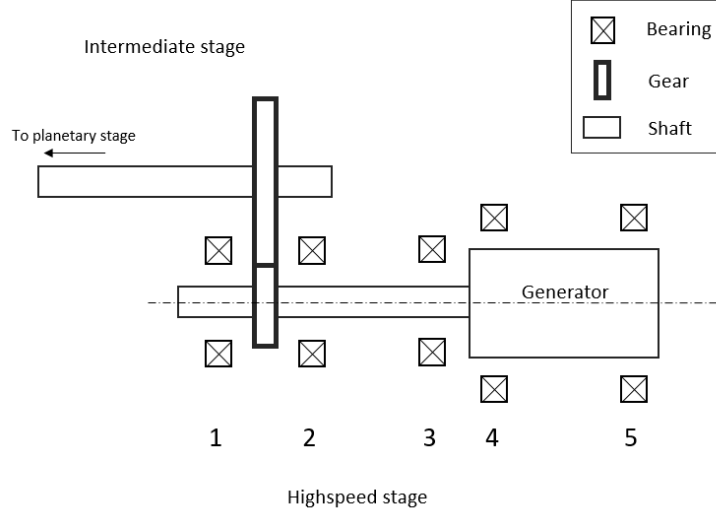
Location of bearings on the highspeed assembly where: 1) Upwind HS bearing, 2) Downwind rotor side HS bearing, 3) Downwind gen side HS bearing, 4) Drive end generator bearing and 5) Non-drive end generator bearing.
